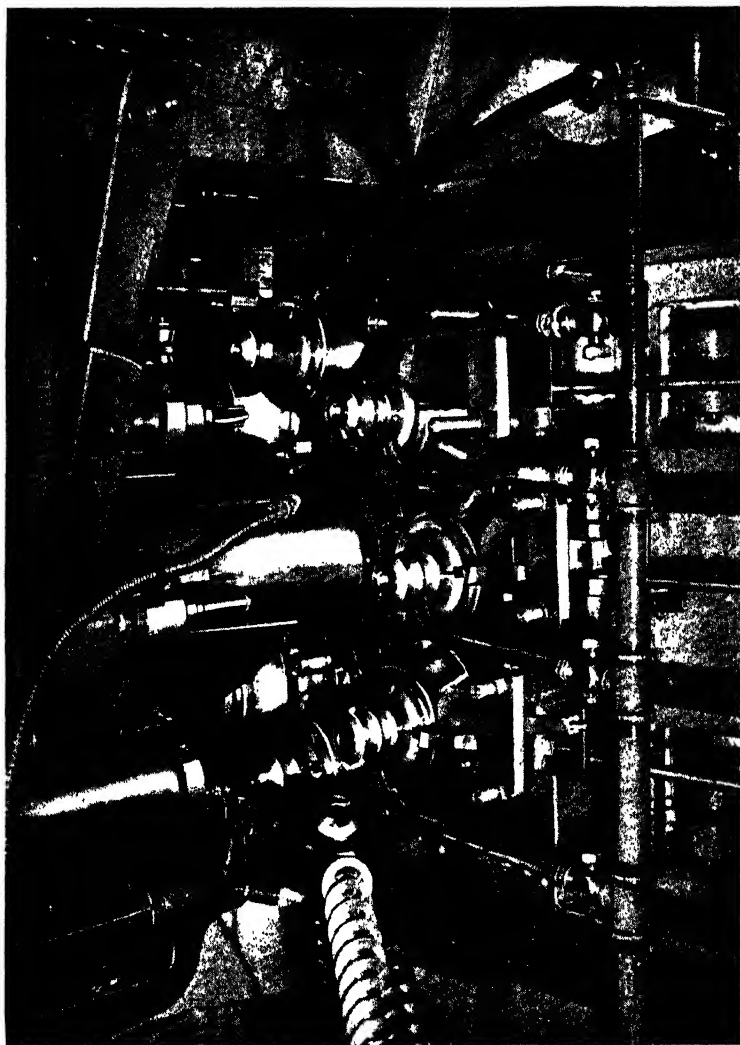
Tooling Provided on an Eight-spindle Automatic
